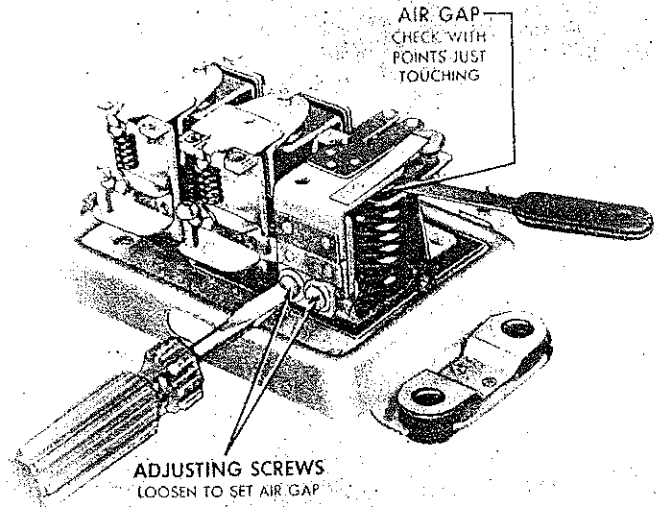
Adjusting armature air gap of cutout relay on Delco-Remy single core regulators with screw adjustment
